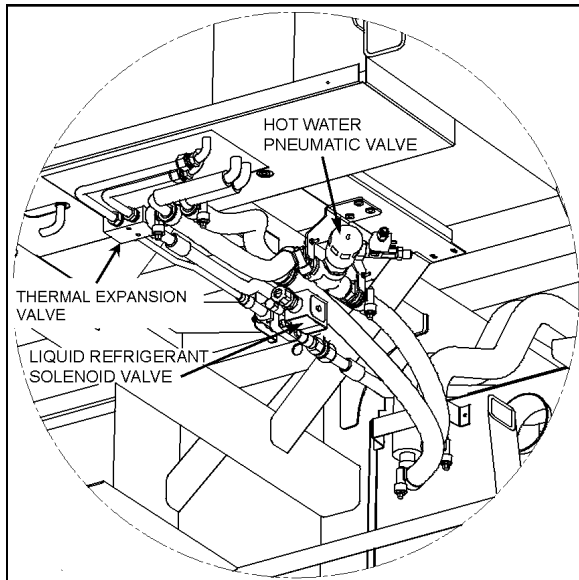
DRIVER'S EVAPORATOR LIQUID SOLENOID VALVE 22324
